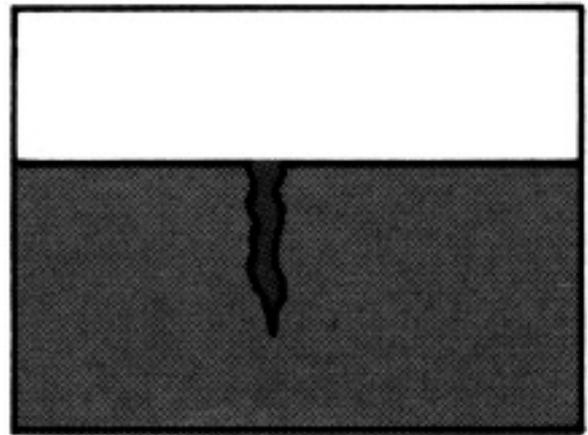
The surface is wiped clean but dye penetrant remains in crack.
